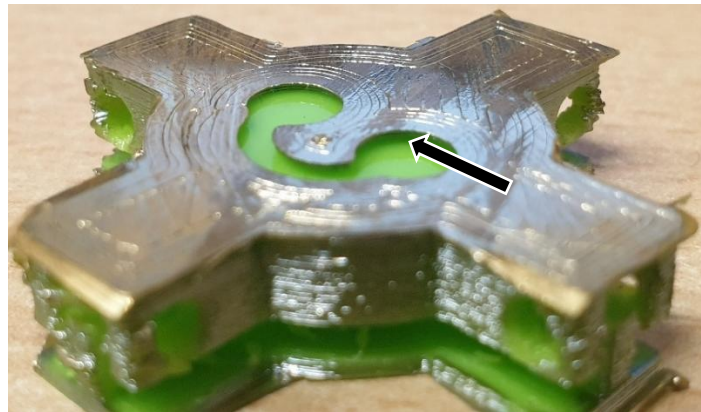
Photo of a QCM in a single part top piece 3D printed mask design.
